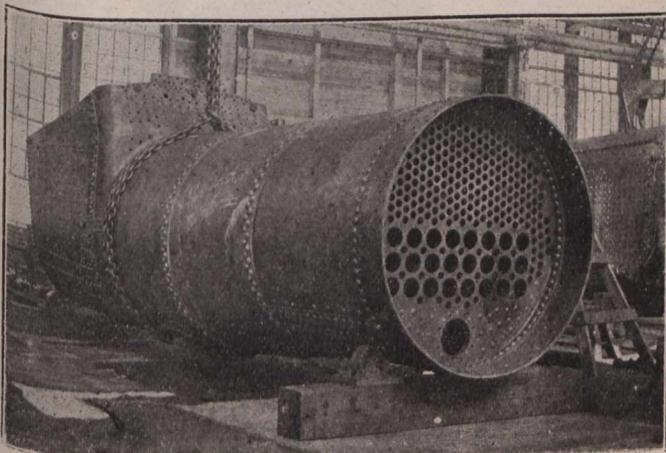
Boiler on Stand after Face Sheet and Mud Ring are put in place.
